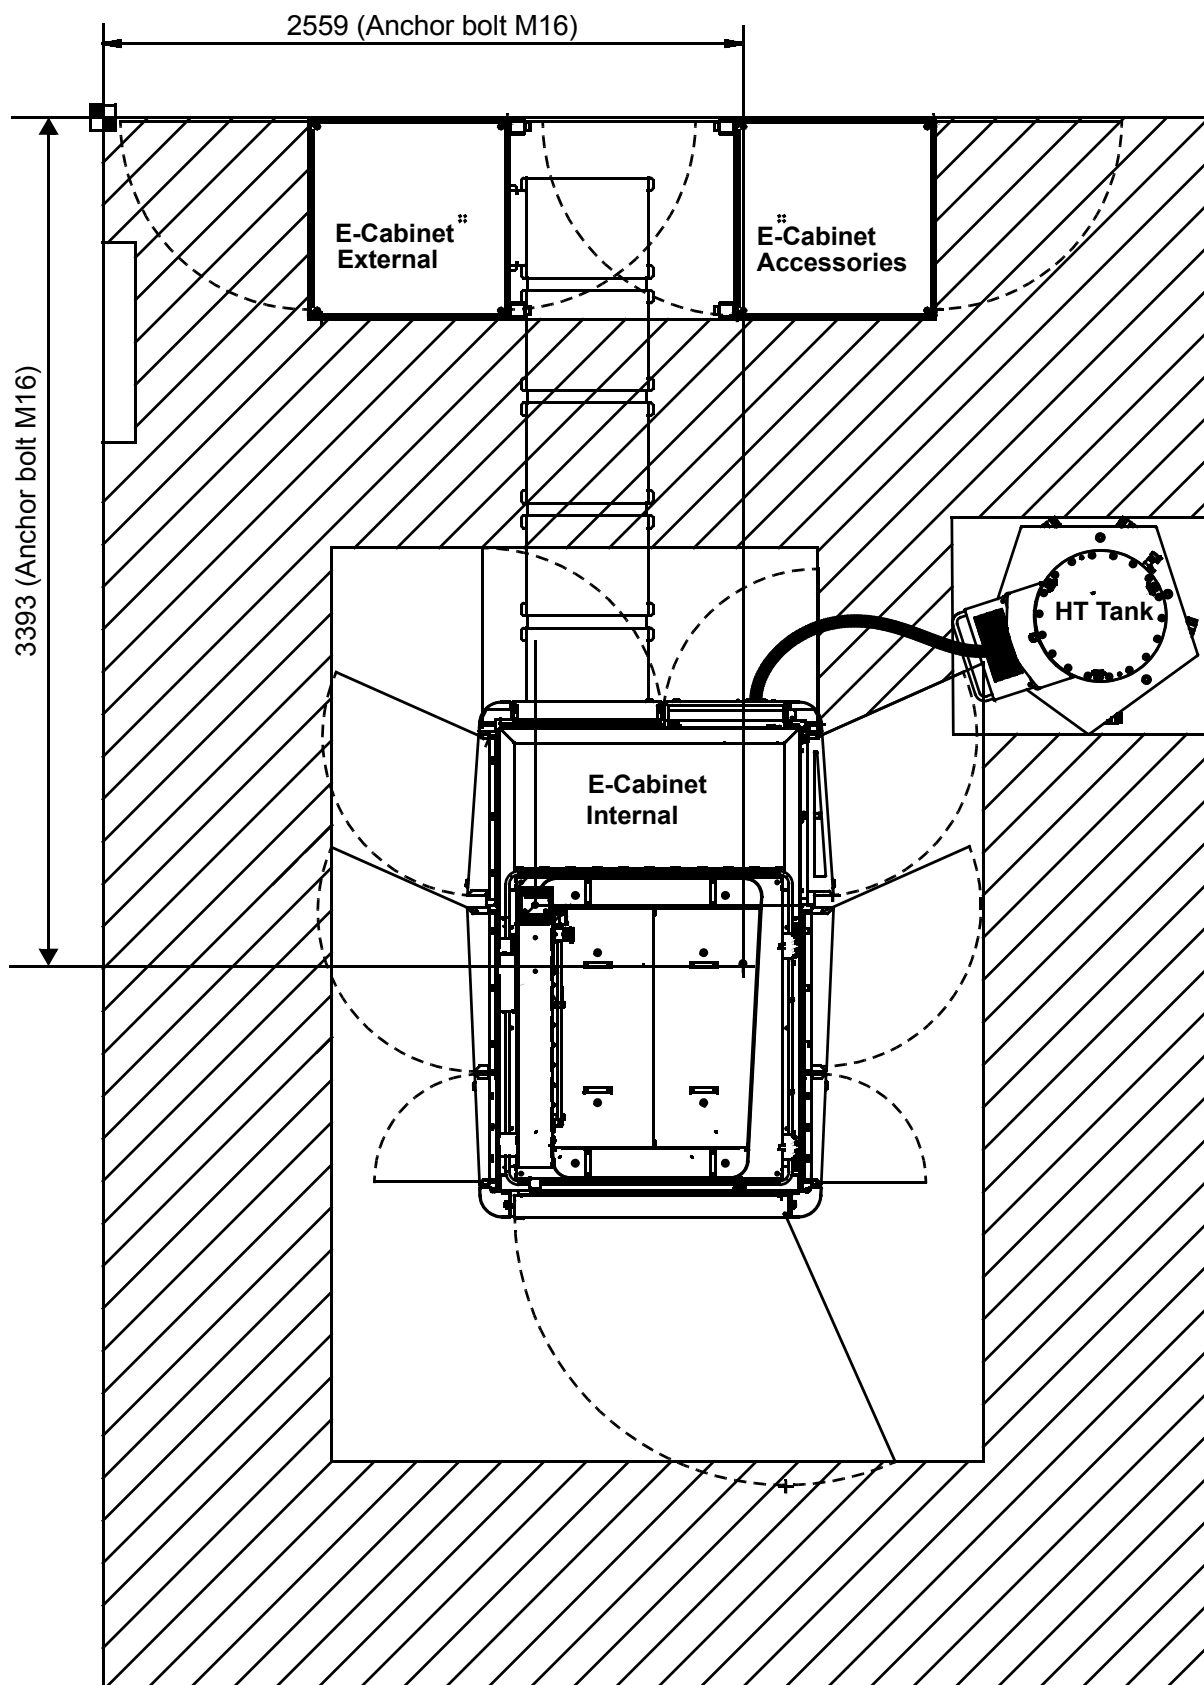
Talos drill overview for tilting anchoring (1 hole) (dimensions in mm)
